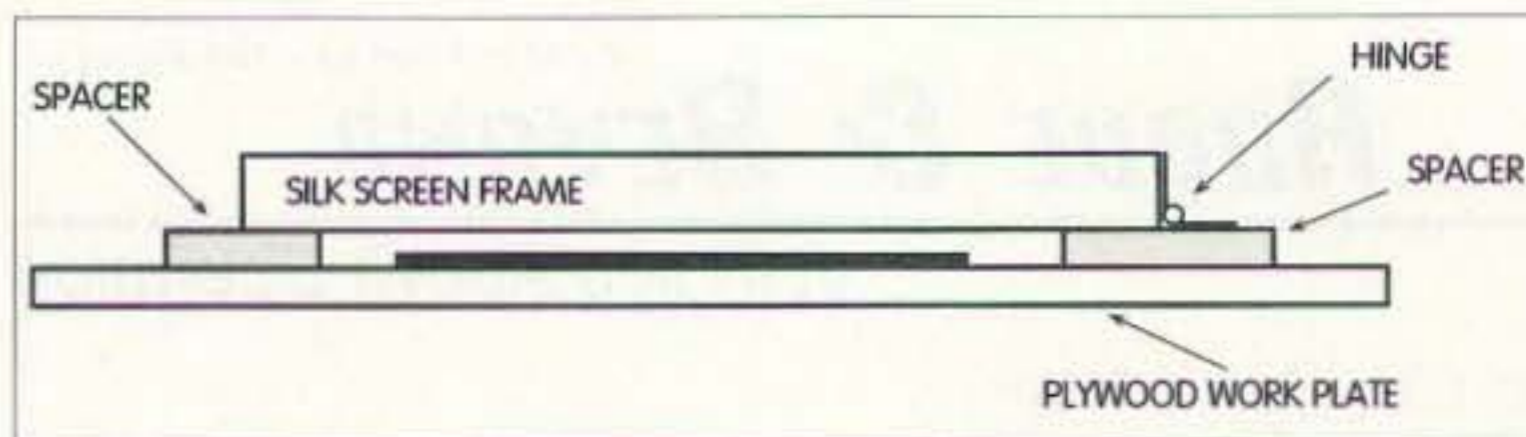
Side view of silk-screen frame shows hinge to lift frame for board insertion and spacer to allow a small space between bottom of screen material and top of PC board. This ensures that contact with the PC board will be only at the edge of the squeegee as it is pulled along the length of the PC board pattern on the silk-screen frame.
